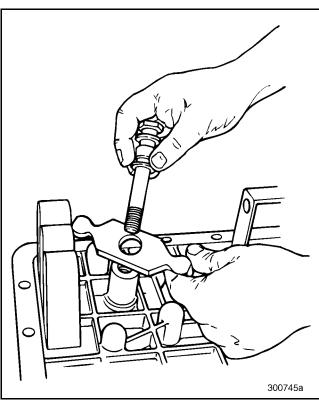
Removing Fourth/Fifth Rocker Pin and Rocker Arm
